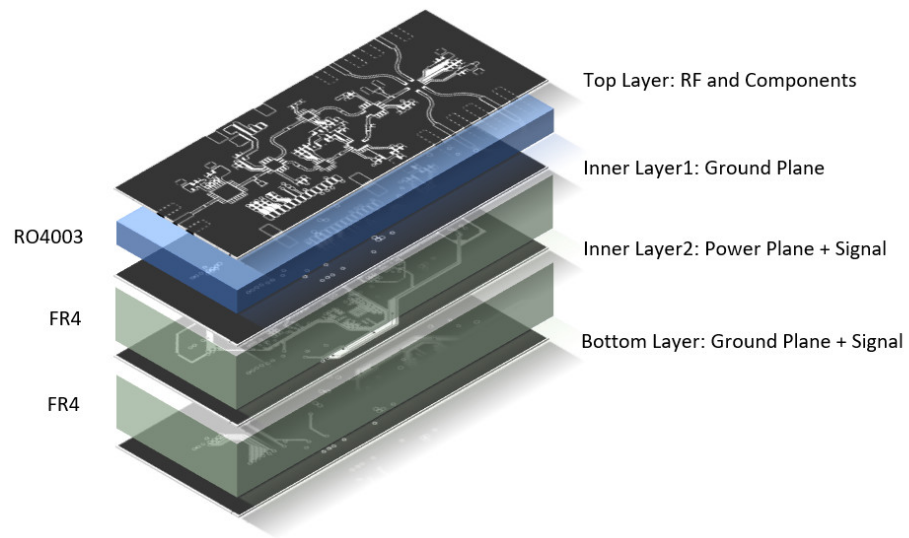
The PCB cross-sectional view of the T/R module.
